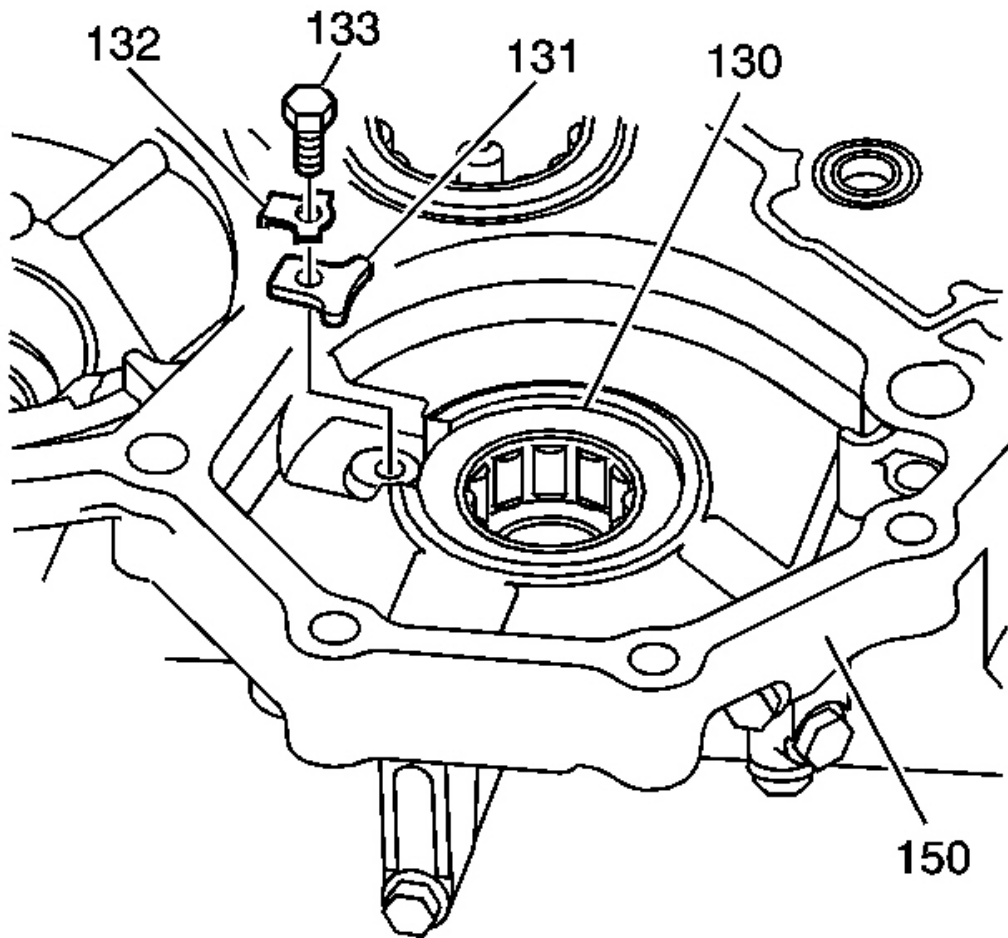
1st/2nd Clutch Shaft Intermediate Bearing Retainer Bolt & Torque Converter Housing
